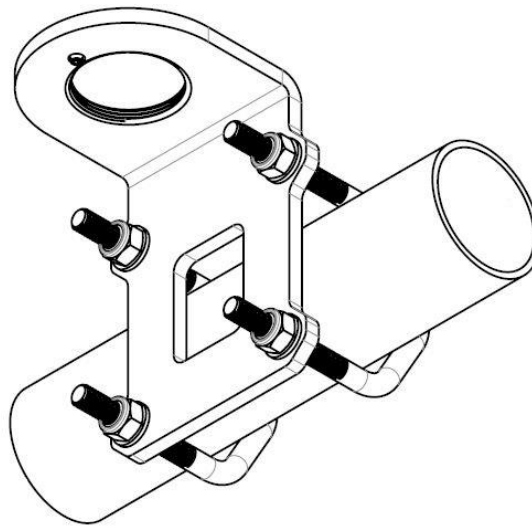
Bracket Mount (1.5" to 2.5" tube), Antenna Unit – horizontal tube mount.
